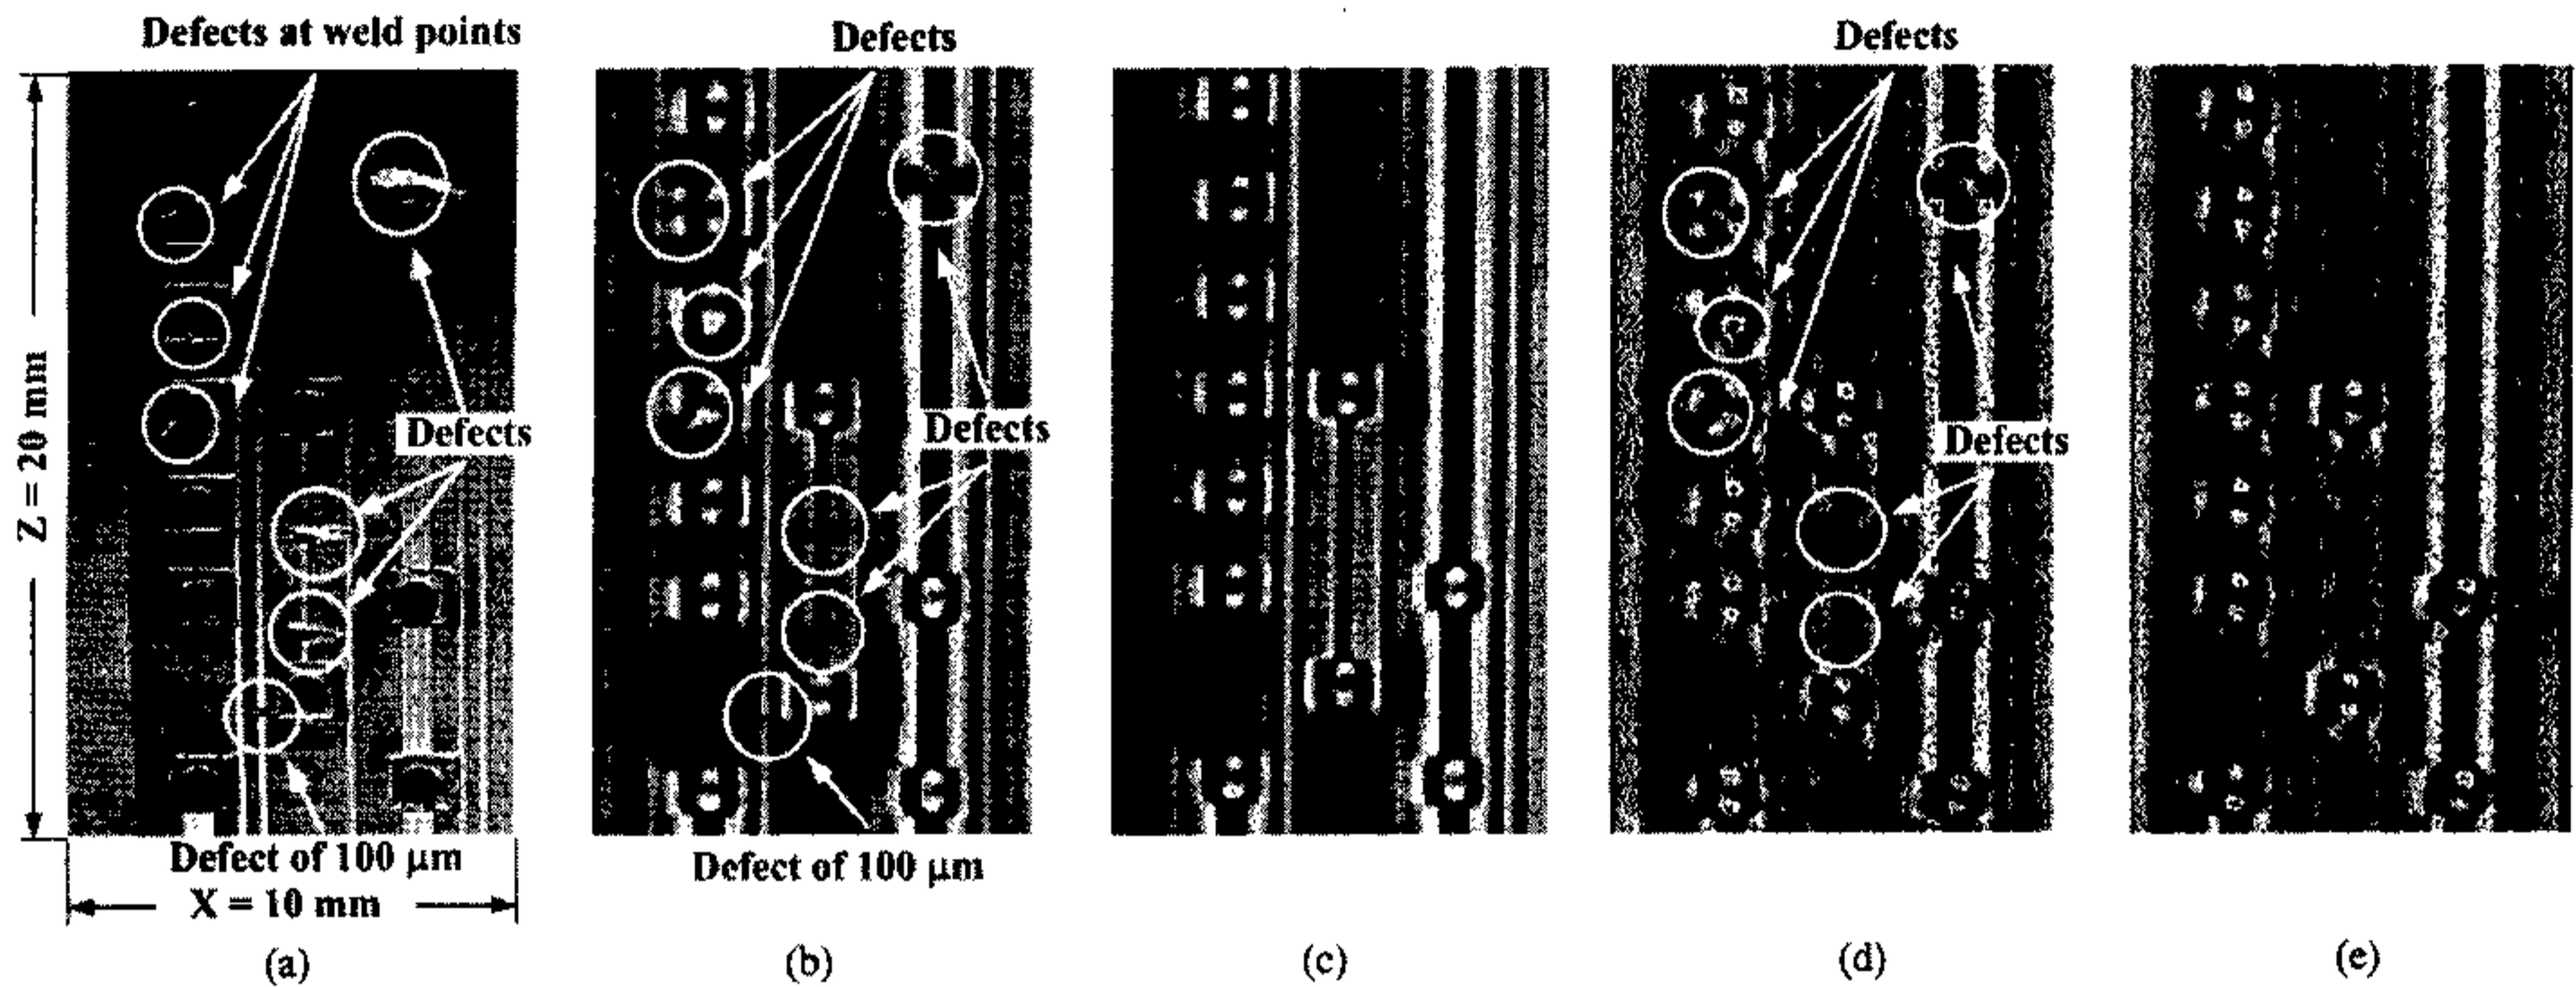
(a) Photograph of defect PCB model. (b) Two-dimensional (2-D) images of defect PCB model and (c) nondefect PCB model achieved from SV-GMR sensor, respectively. (d) The 2-D images of defect PCB model and (e) nondefect PCB model achieved from solenoid coil, respectively.
